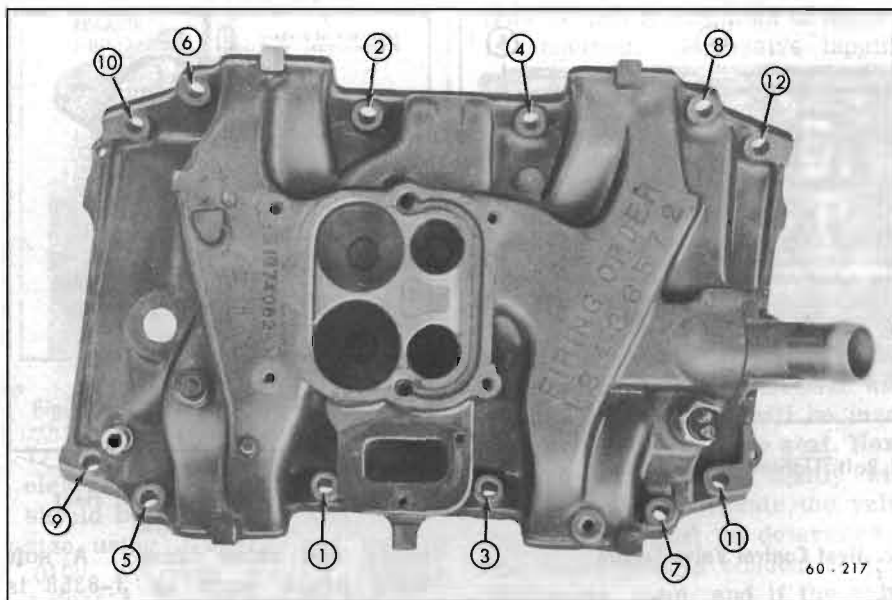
Intake Manifold Bolt Tightening Sequence
